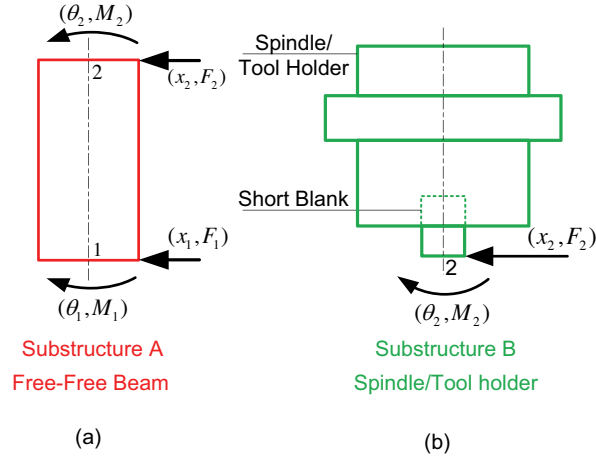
Degrees of freedom of end mill and spindle/tool holder
